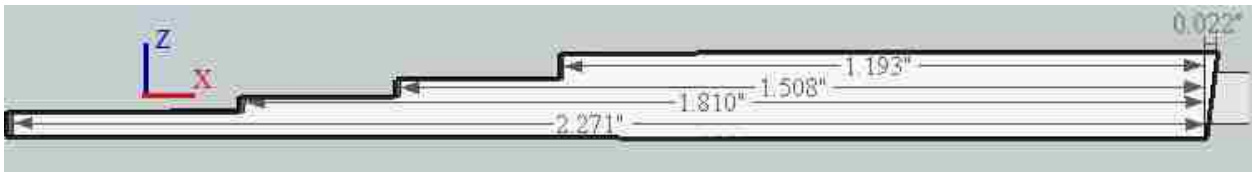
Cross sectional view of the 20x20 cm² upper trimmer lead plate in the cross-plane dimension illustrating the lateral dimensions of the plate.
